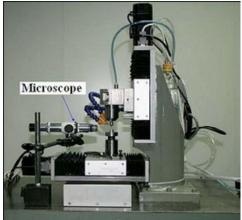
Outlook of the three-axis desktop milling machine tool [3].
